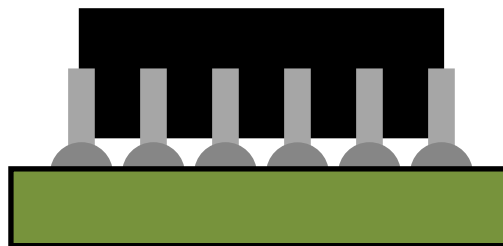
Example of solder joints created by reflowing the solder of the assemble post placement
